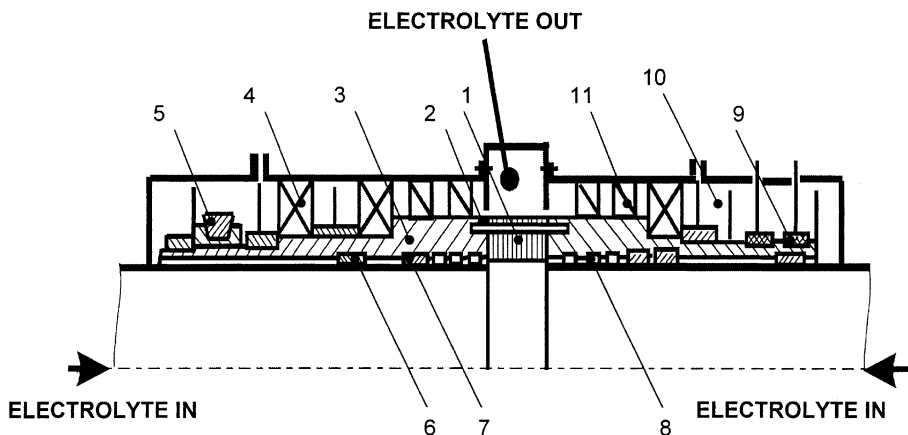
Scheme of the test section: 1—porous rotor with radial circular channels, 2—driving pin, 3—hub, 4—ball bearing, 5—V-belt, 6—spacer ring, 7—O-ring seal, 8—labyrinth seal, 9—collector ring, 10—thrower, 11—sink.
